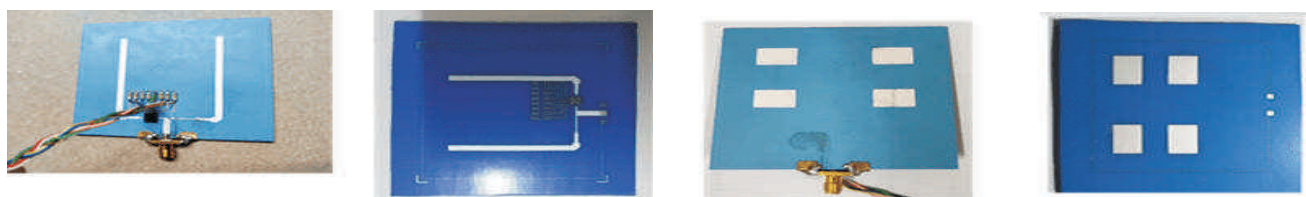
Microwave beam steering circuit (Top & bottom surfaces) made and assembled in LTCC using Dupont tape & CMET's Tape
